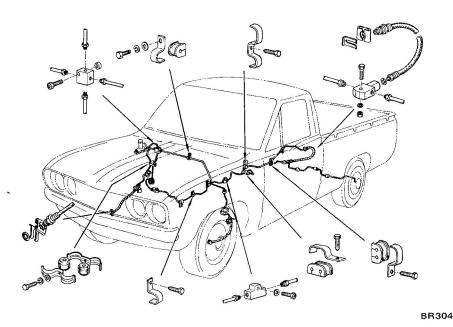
Brake line of R.H. drive (Single master cylinder)
